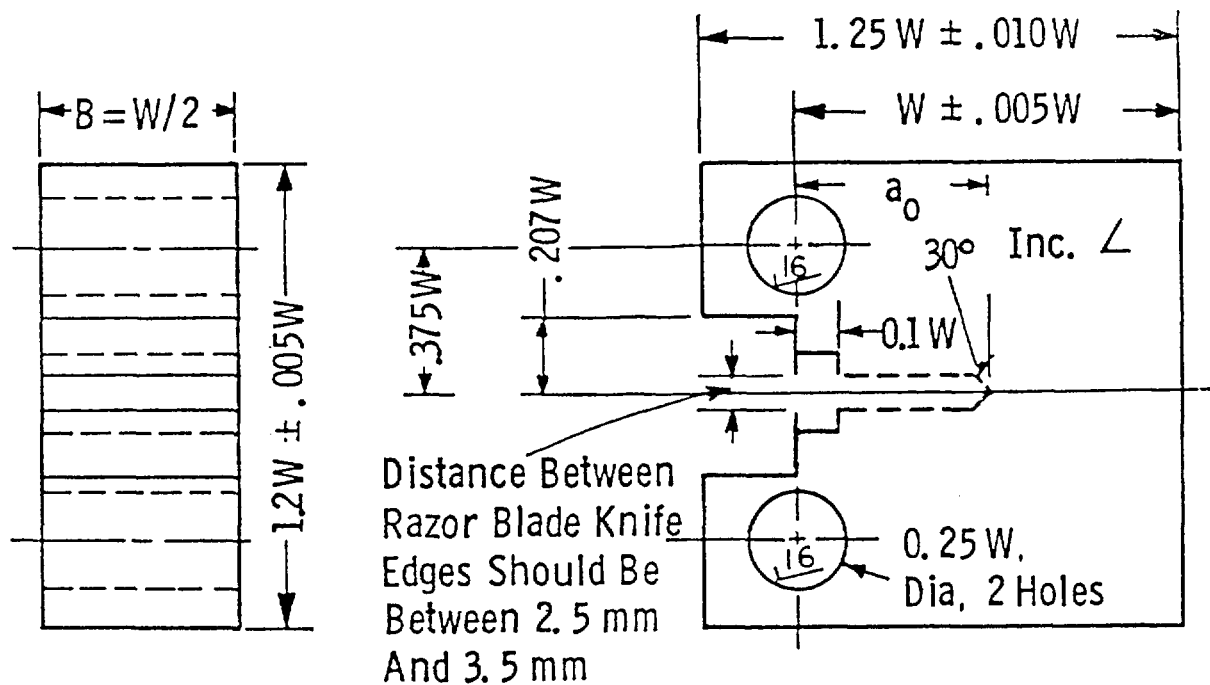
Compact-tension specimen design for fracture-mechanics experiments.
